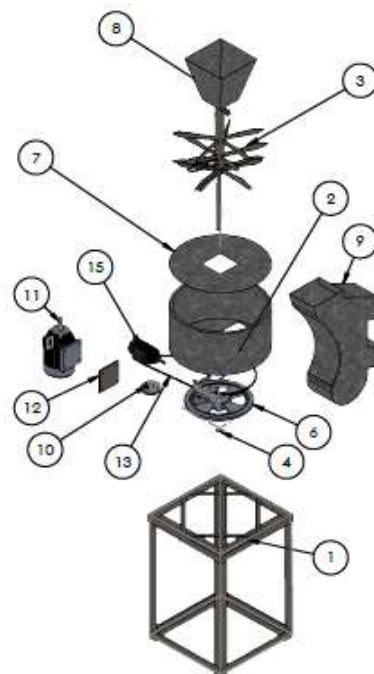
sketch of the sachu inchi decapsulator machine list of mechanical design elements
